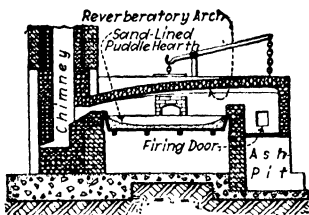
Longitudinal sectional elevation of puddling furnace.
